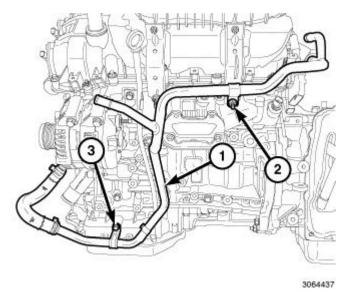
Heater Core Return Tube, Nut & Bolt Courtesy of CHRYSLER GROUP, LLC
